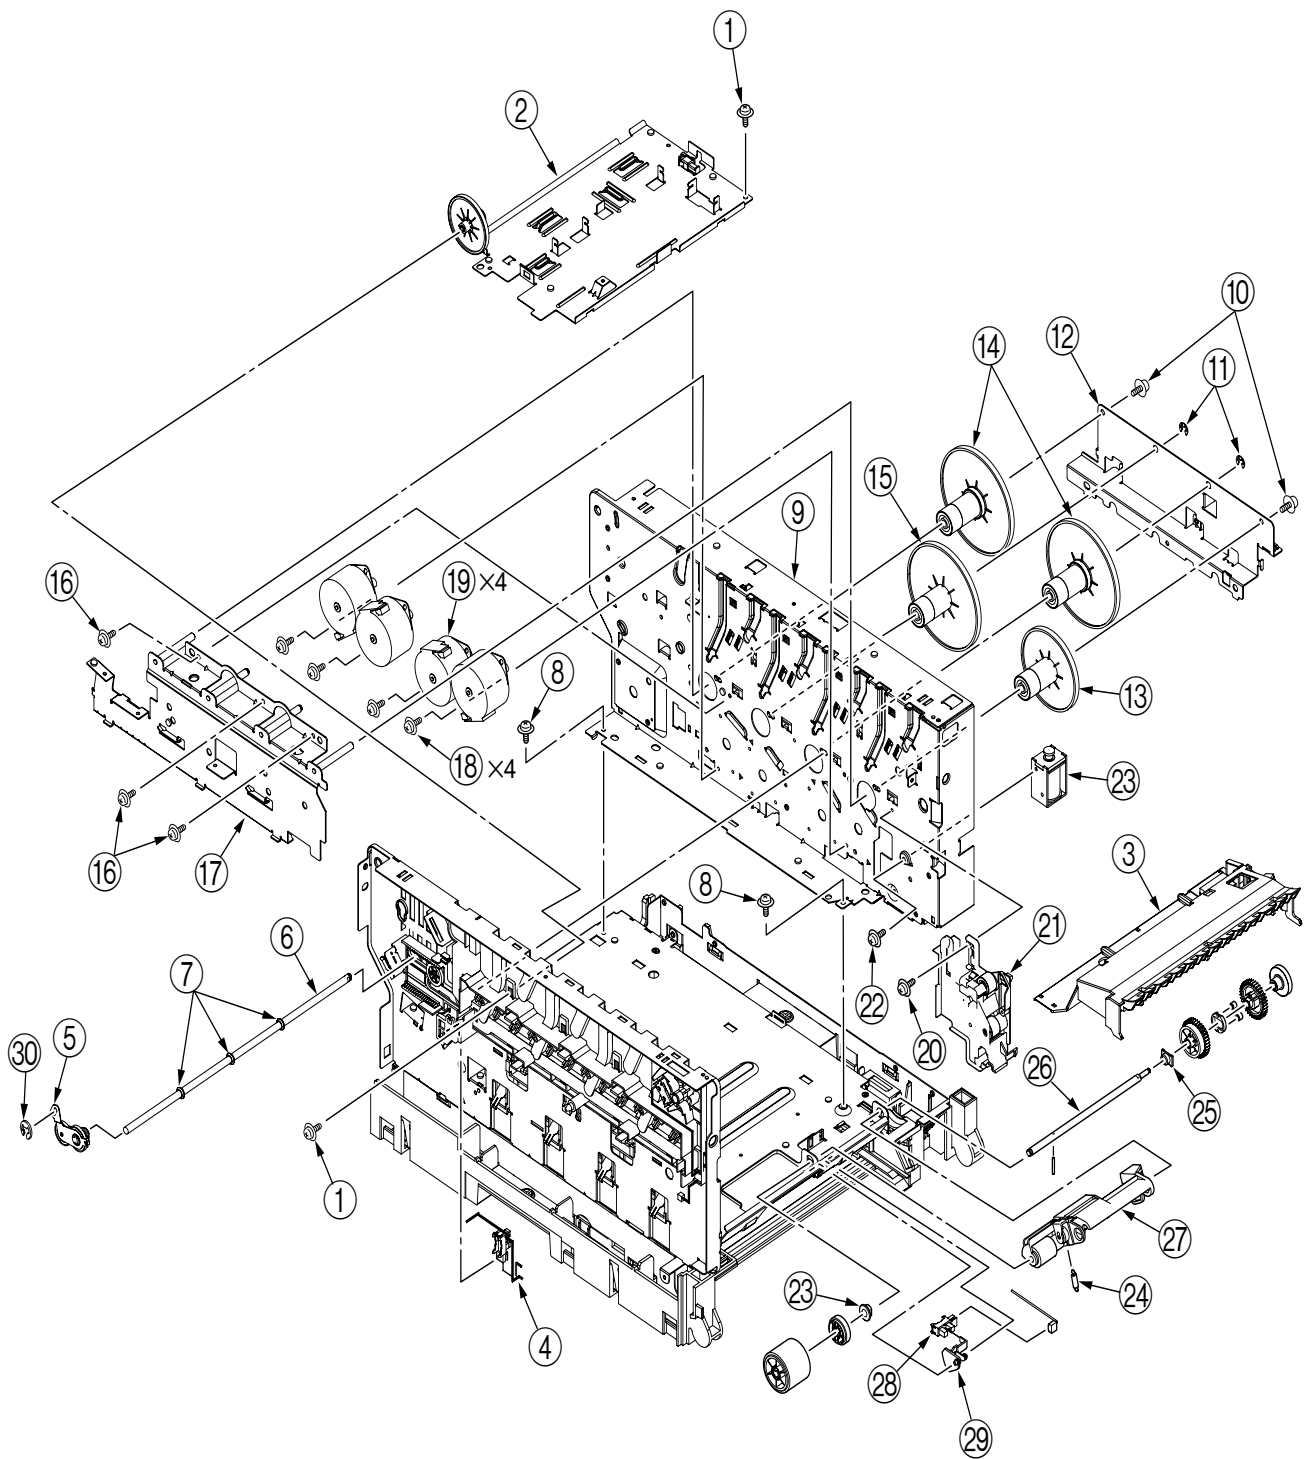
Main Motors / Solenoid / Paper-End Sensor
